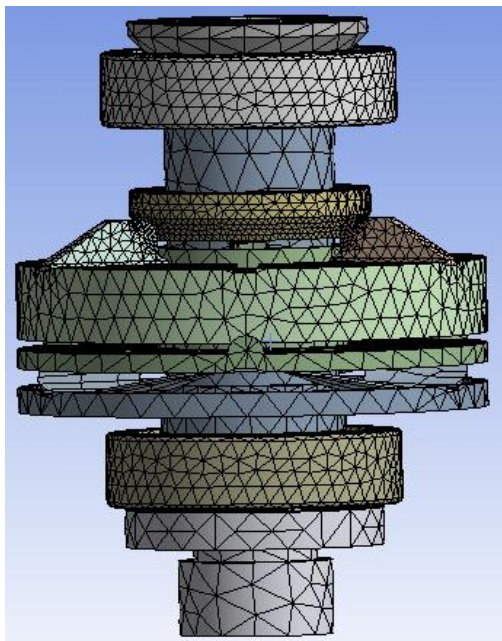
Inner and outer ball bearing simulated using 3D spring
